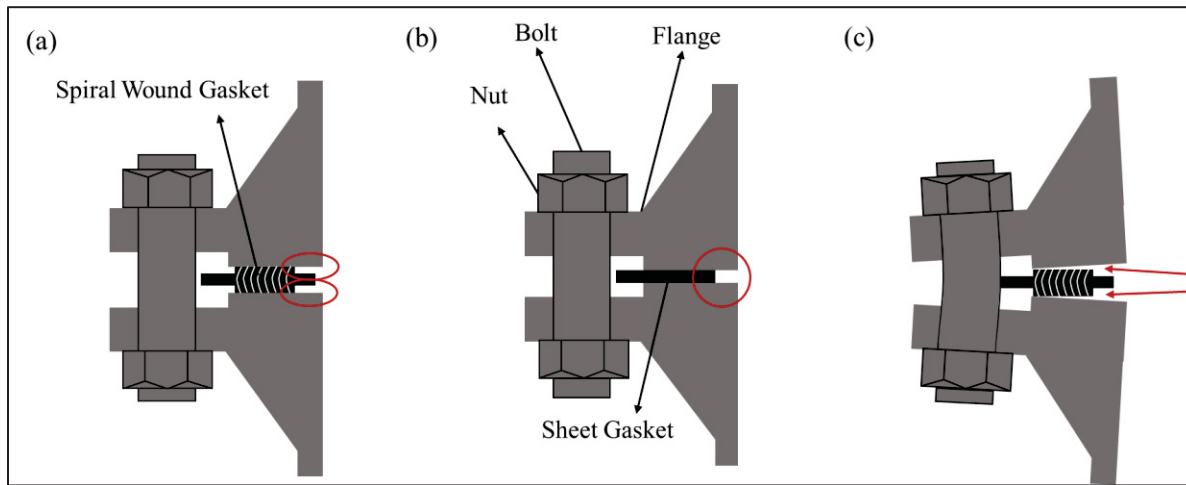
Schematic of vulnerable places for crevice corrosion between gaskets and flanges: (a) standard spiral wound with inner ring-crevice at ID; (b) standard cut-sheet gasket-crevice at ID; (c) crevices above and below spiral wound inner ring
